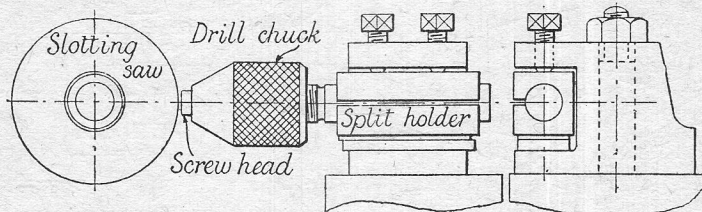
Screw held in drill chuck, mounted in toolpost by means of a split holder, for slotting operation on head
